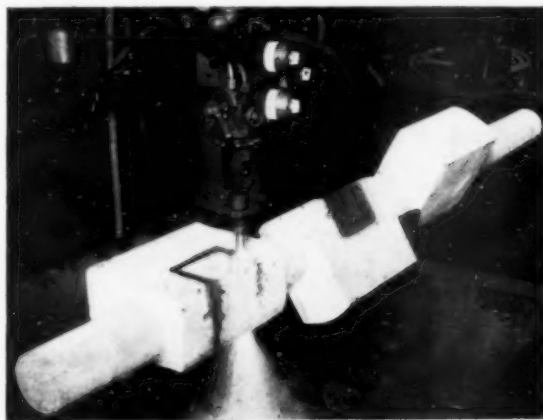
Gapping out a crankshaft forging with a 55-in. oxygen cutting machine, by British Oxygen Co., Ltd.
